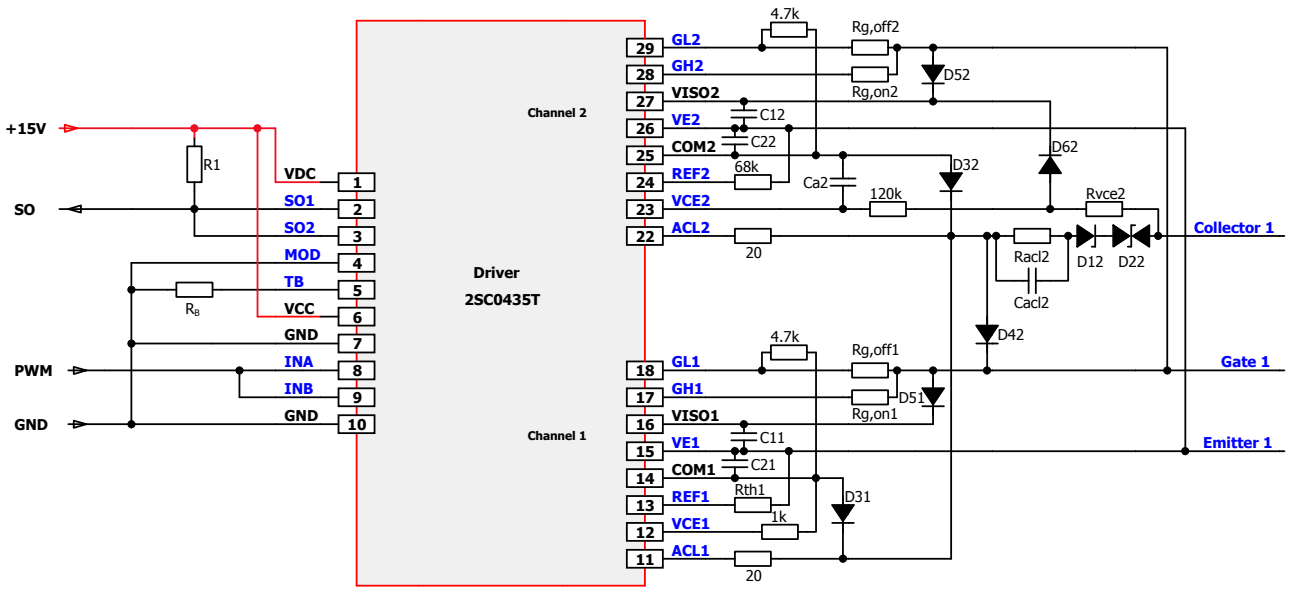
Paralleling a dual-channel driver to a single output (example with 2SC0435T)
